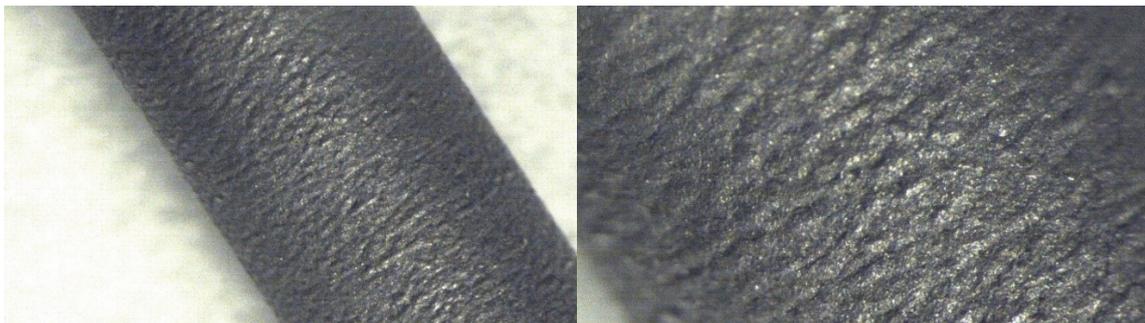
Additively manufactured gas cylinder completed with the pipe diameter 18.24 mm.
